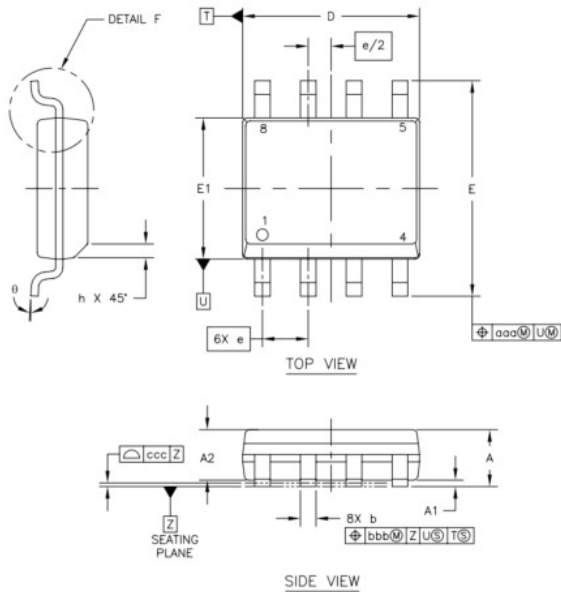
SOW8 Package Shape and Dimension in millimeters
